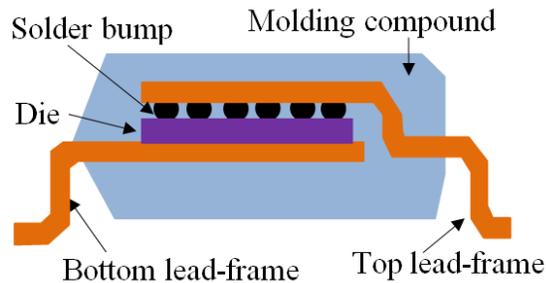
Schematic illustration of TO-8 wireless power MOSFET packaging
